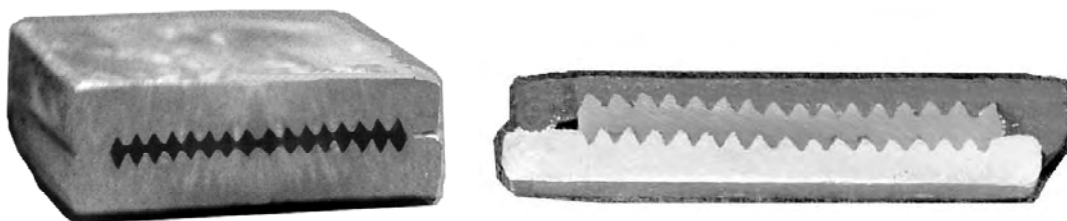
Cold welded samples with intermediate cogged layer.
